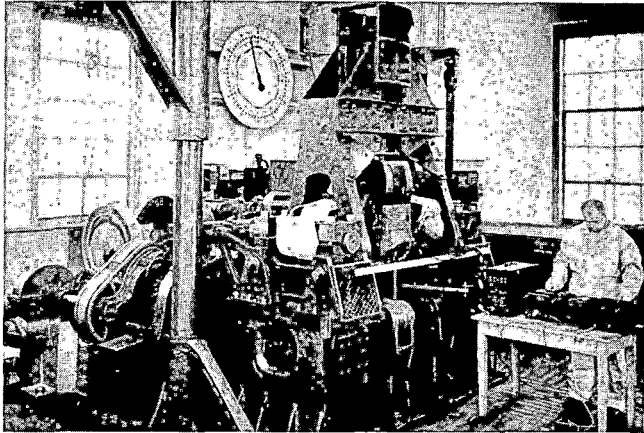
Side frame fatigue testing machine at Dresser T.E.D.'s DePew, N.Y. plant.
